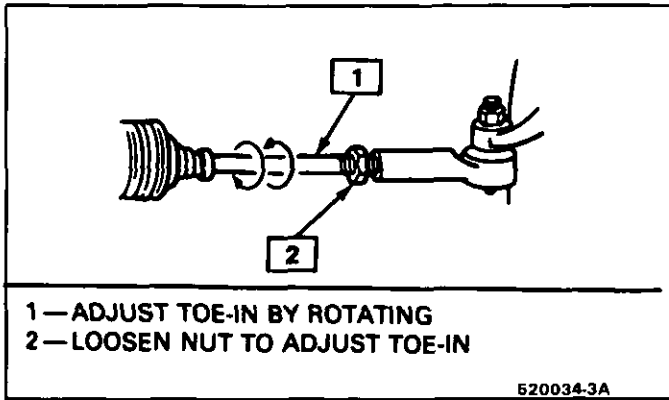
Adjusting Toe-In (Front and Rear) Typical
